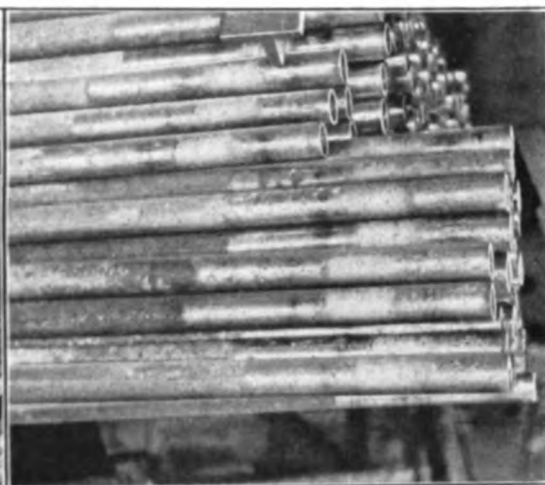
CROSS-VIEW OF ELECTRIC-WELDED SAFE ENDS
